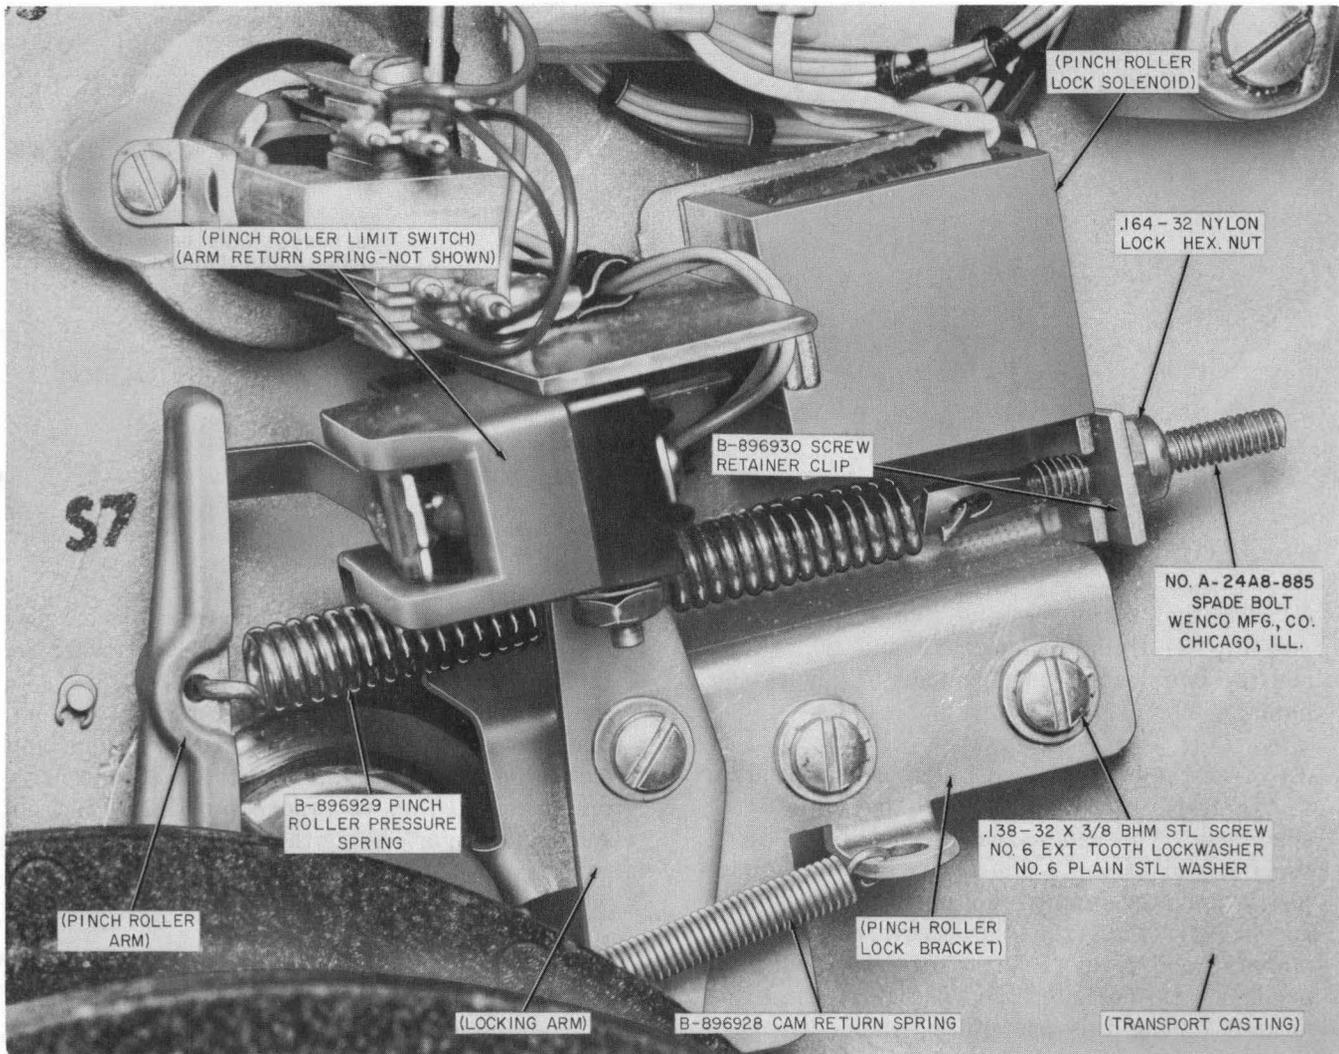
Pinch Roller Lock Solenoid and Associated Parts—Mounted on Transport Casting
